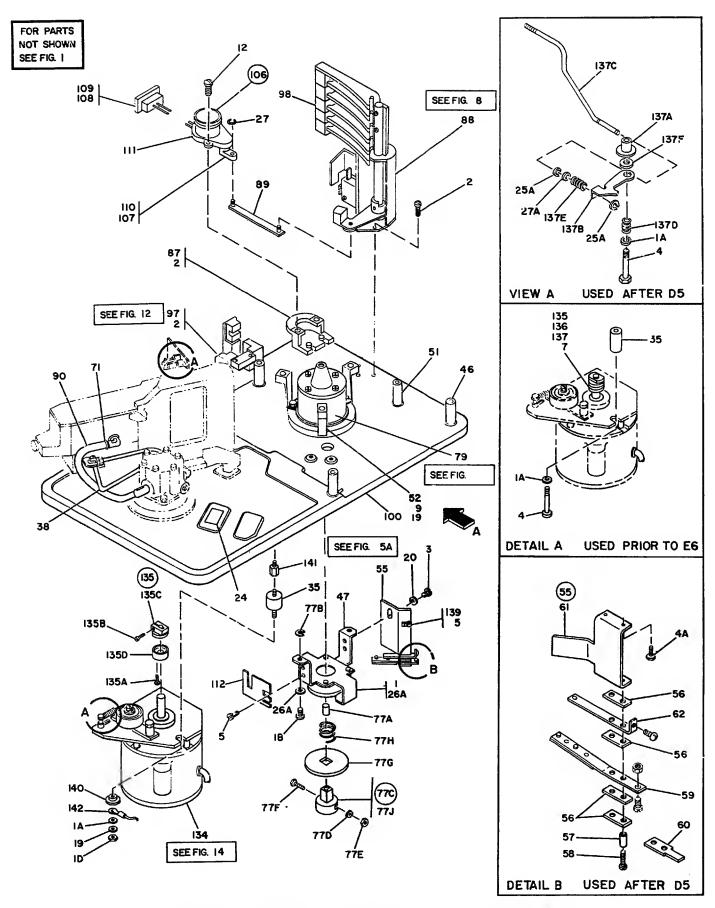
DISK STORAGE FILE ASSEMBLY. SHEET 1 OF 3. SEE LIST 5.
